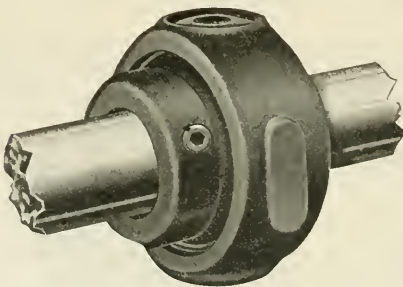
Fafnir Single Ball Bearing Hanger Box
